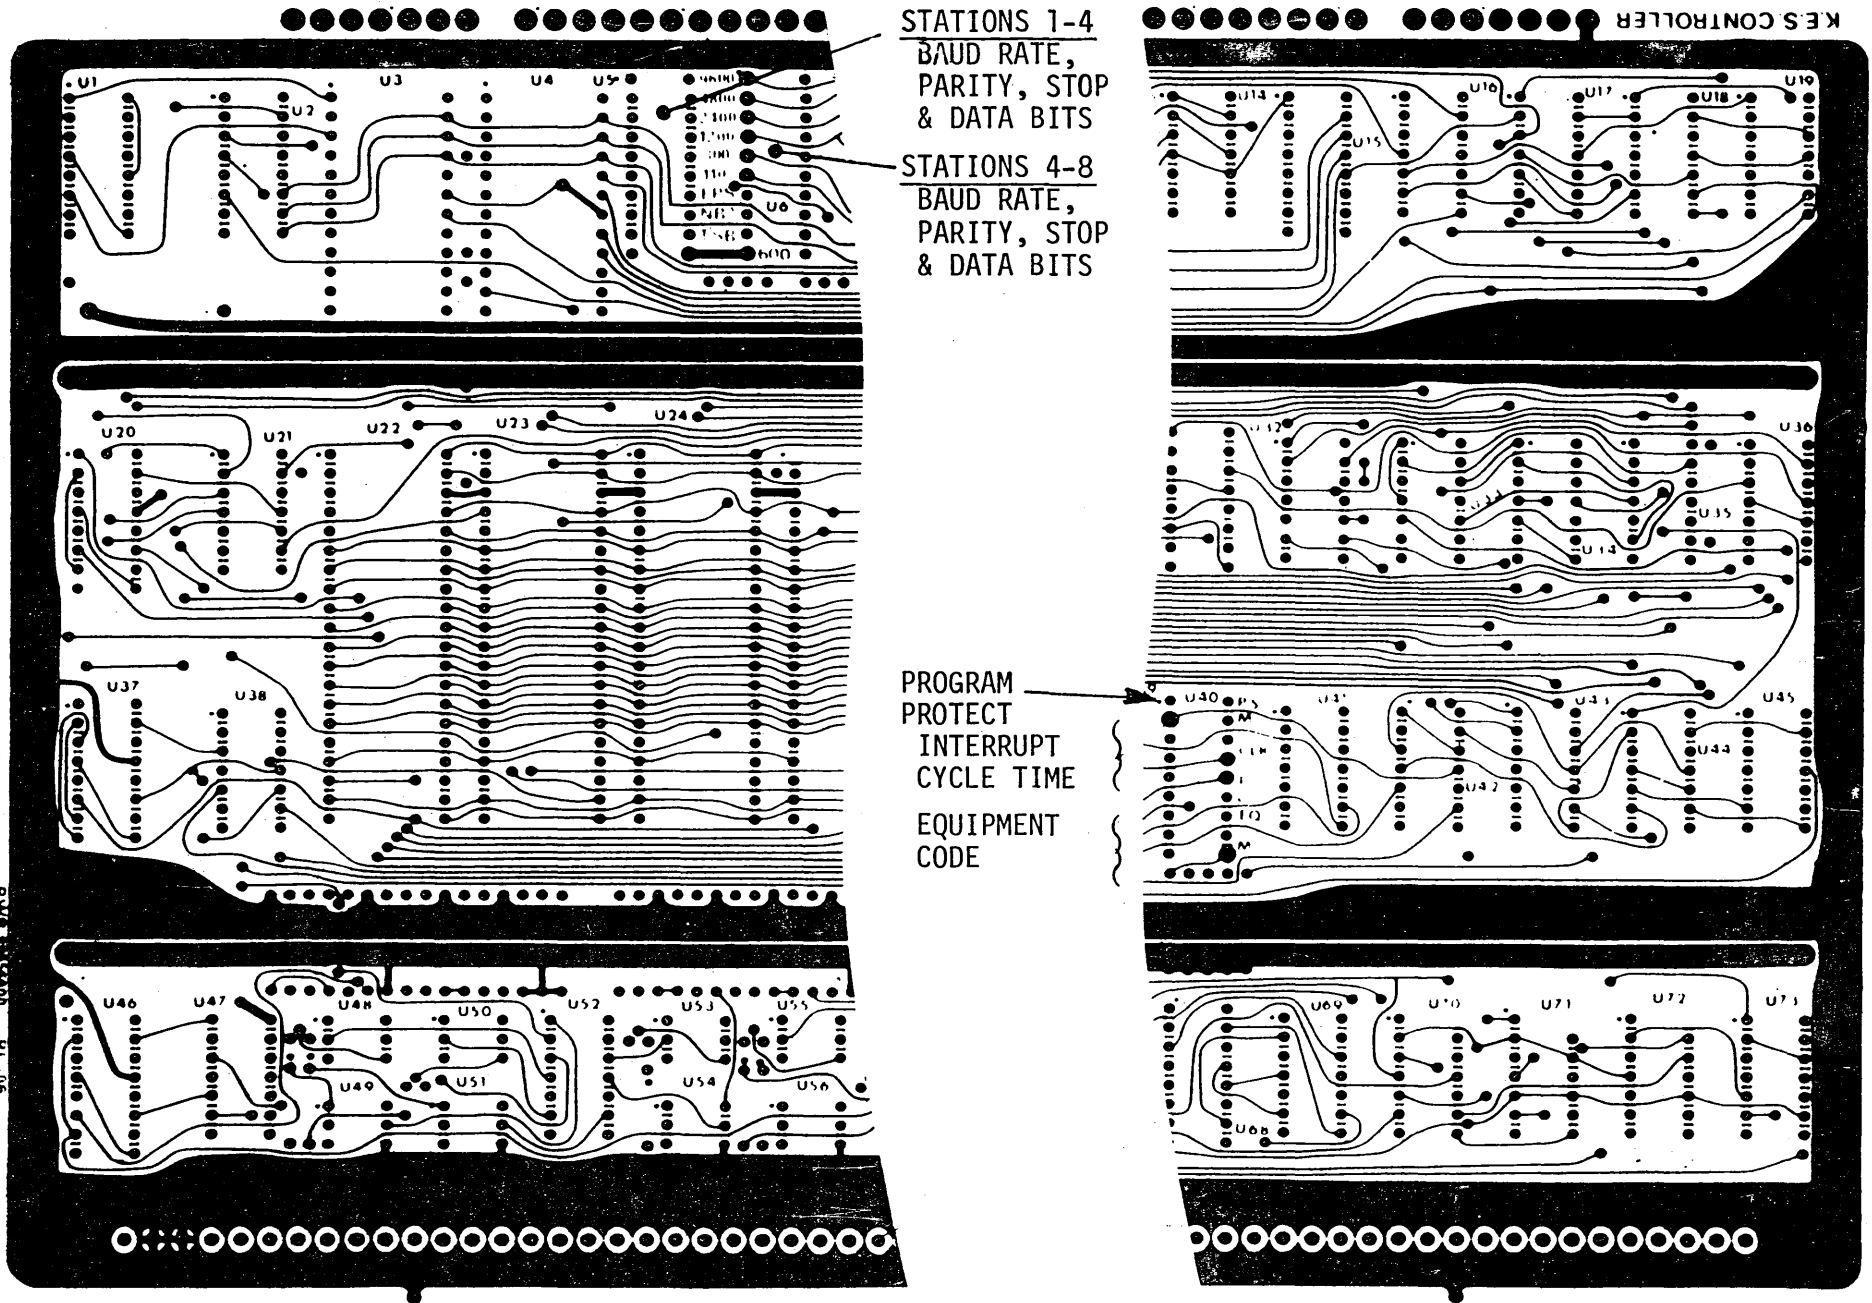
Locations for Internal Select Jumper Plugs on PWB
